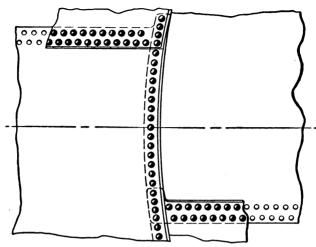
Typical Boiler Shell Showing Method of Riveting and Breaking Joints
